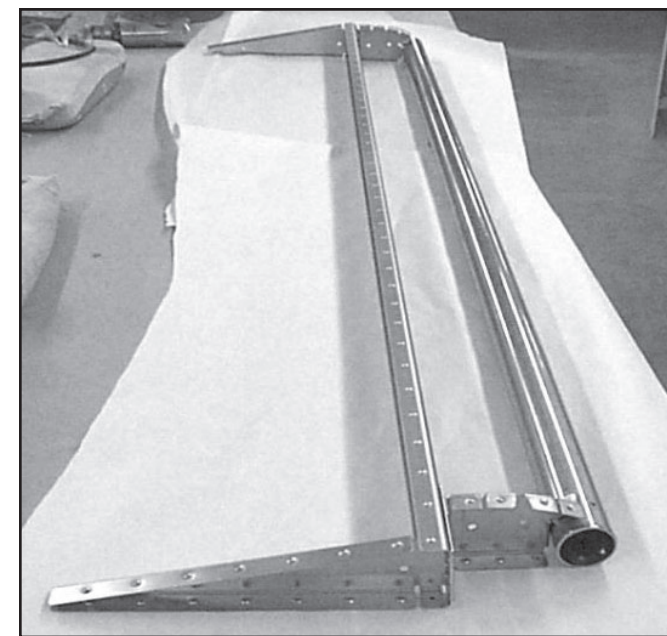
The assembled aileron skeleton with counterbalance tube.
